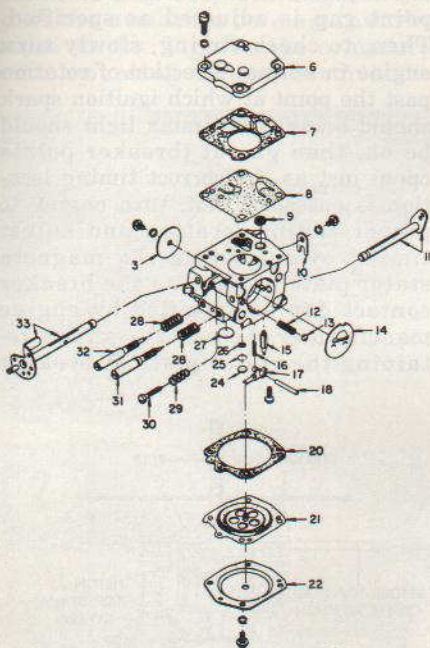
Exploded view of typical Tillotson series HS carburetor.
